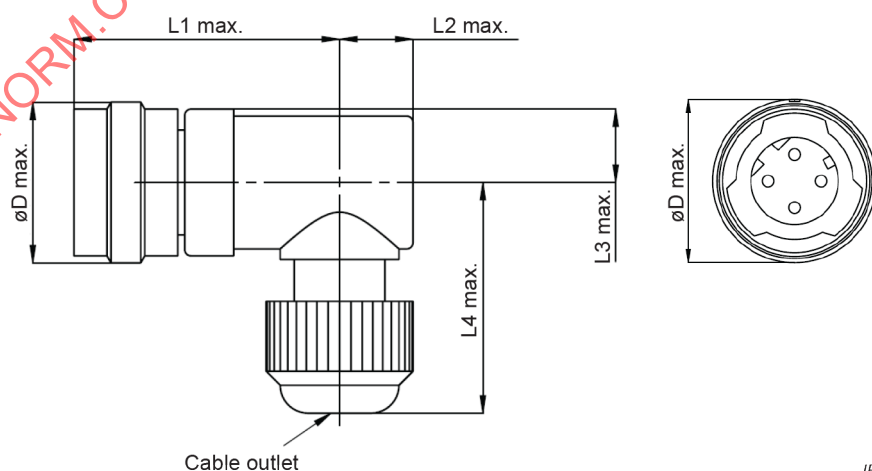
Style KF_M12_PPI – Rewireable connector, with female contacts, right-angled version, with inner push-pull and screw locking
